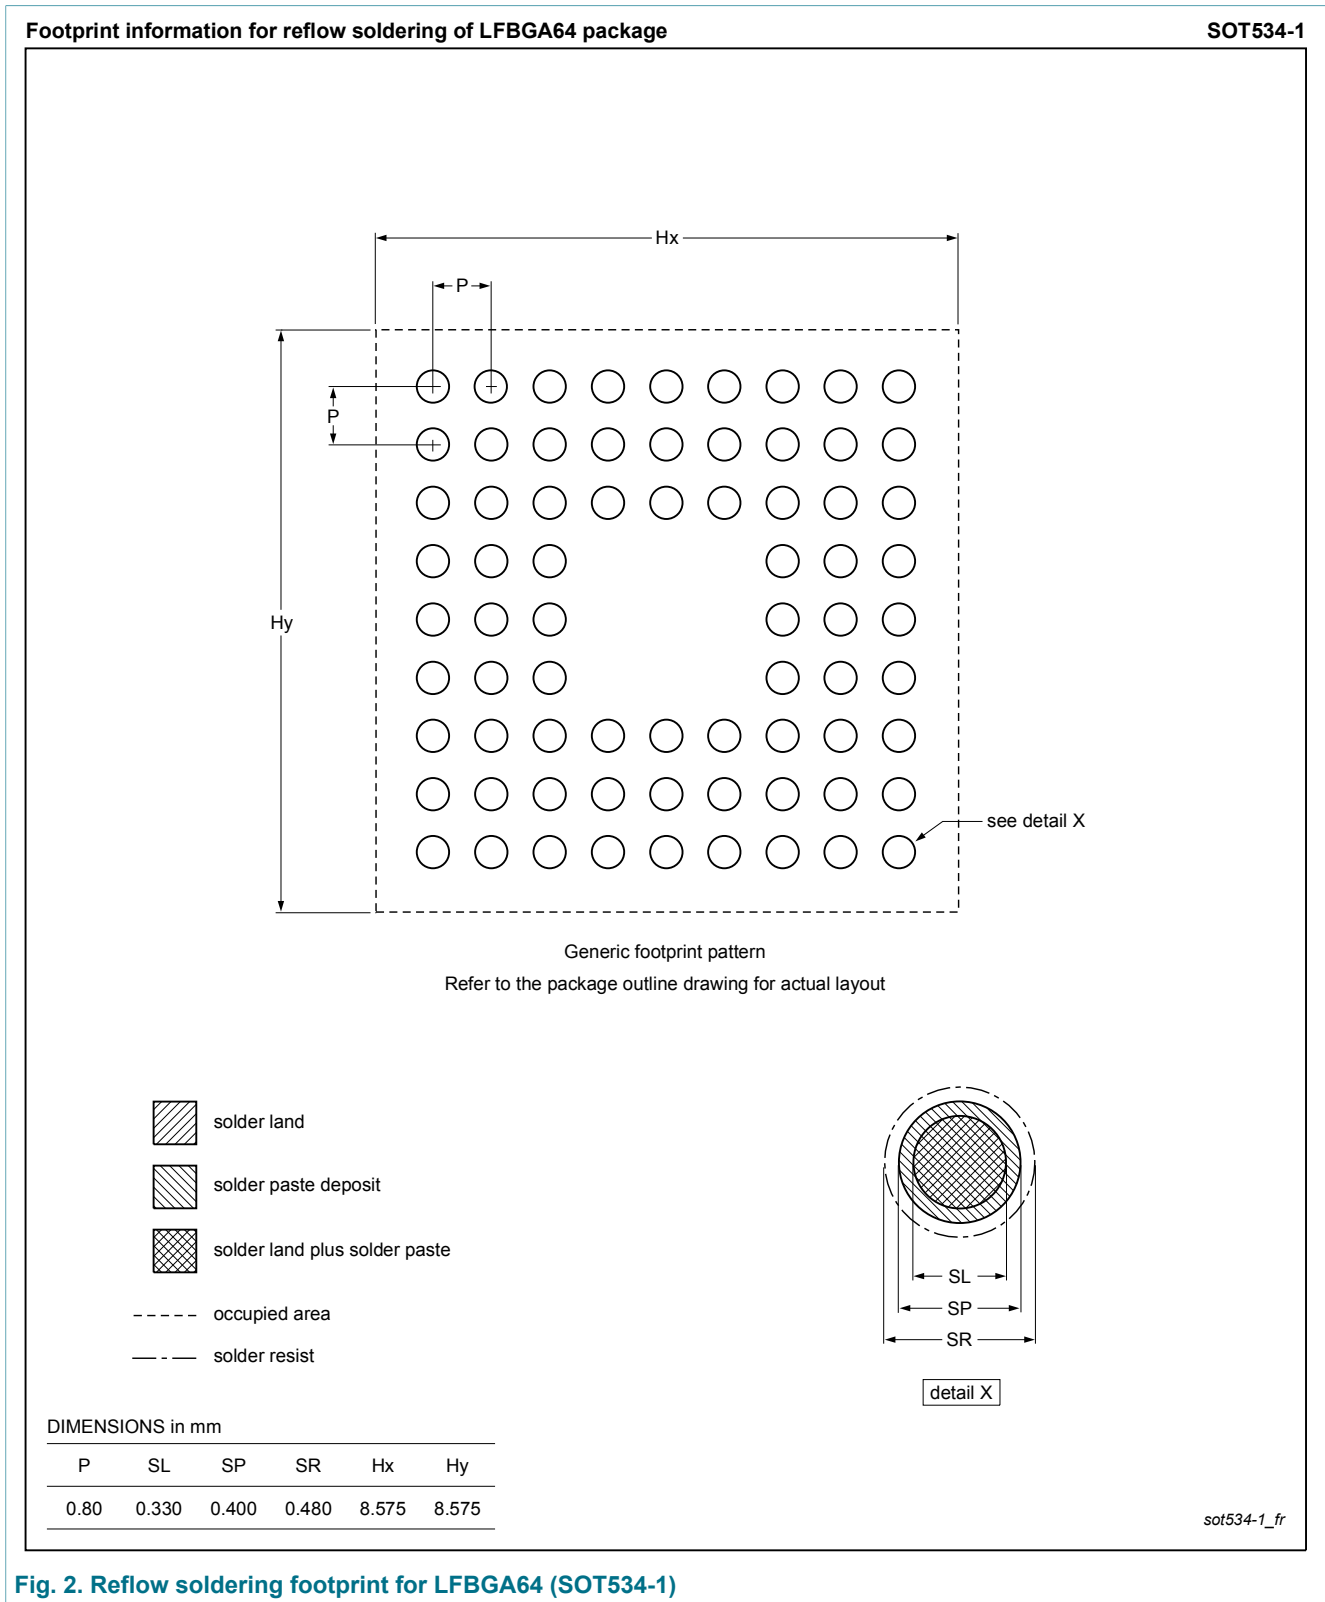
Reflow soldering footprint for LFBGA64 (SOT534-1)
